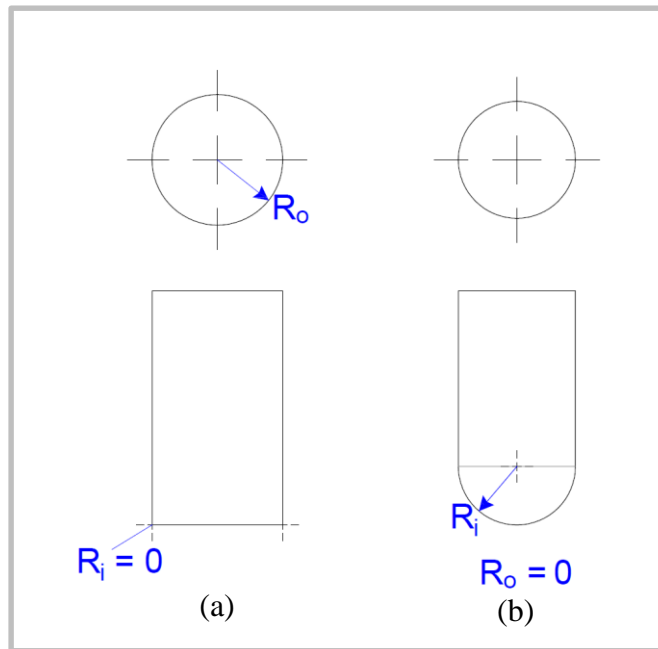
(a) Flat end mill Cutter, (b) Ball nose end mill Cutter
